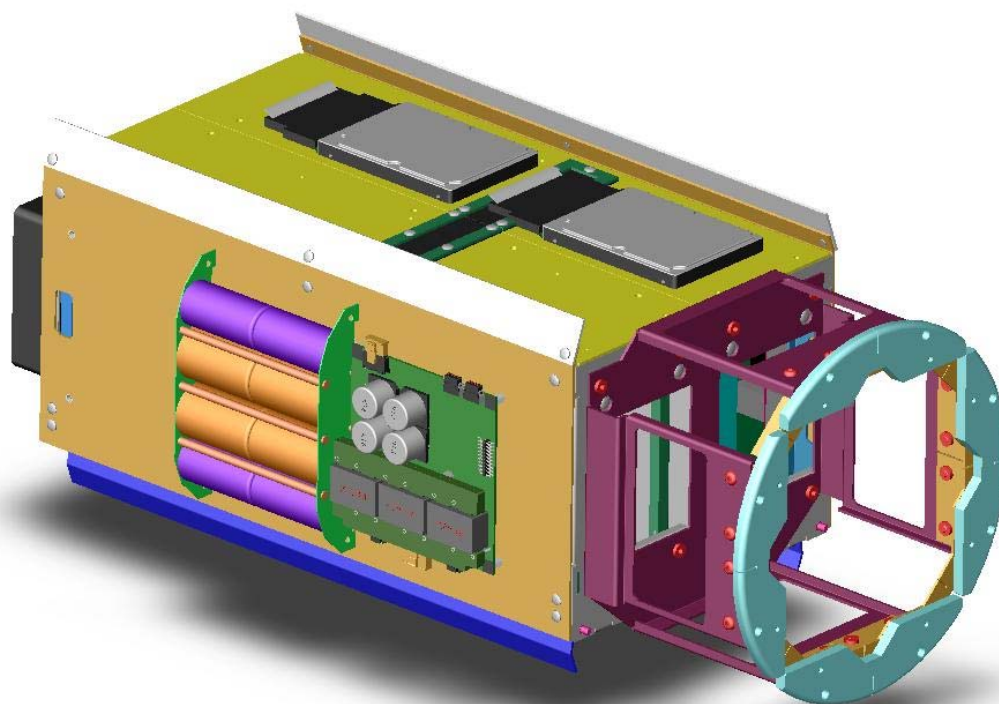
7-I Integrated Control and Processor Unit and Mounting Adaptor
